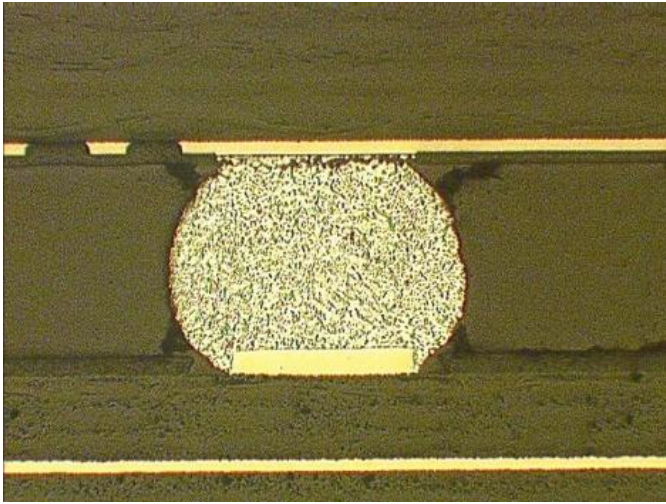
PBGA-225 Solder Joints, Board 168, Component U5, SAC305/SnPb, Failed @ 1926 Cycles
